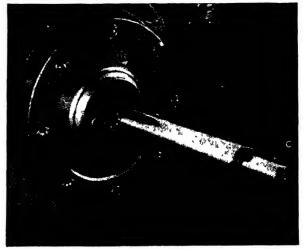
Cut piston rod off at C after clearance is adjusted.
